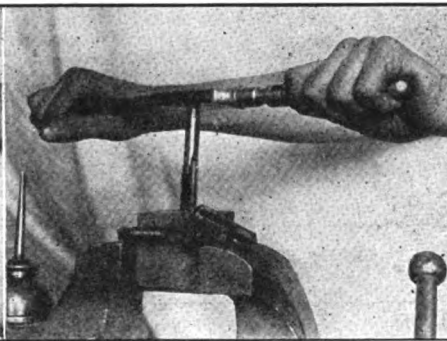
THE PULL ON THE HANDLES SHOULD BE EQUALIZED
